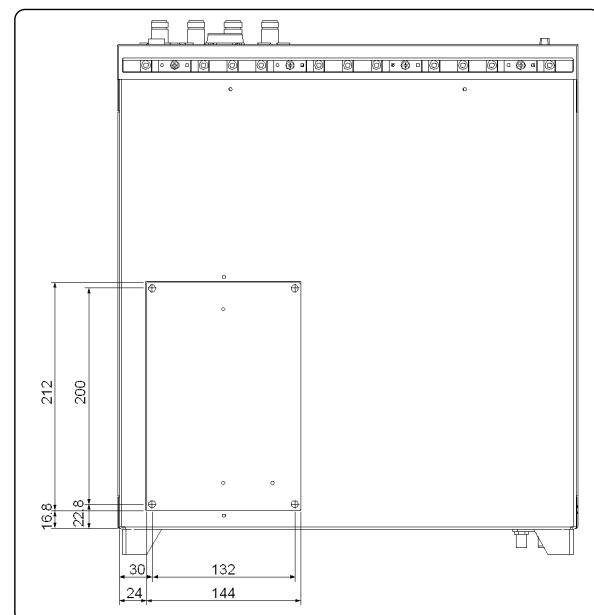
Dimensions (rear view, with option E5070B/E5071B-1E5, in millimeters, nominal)
